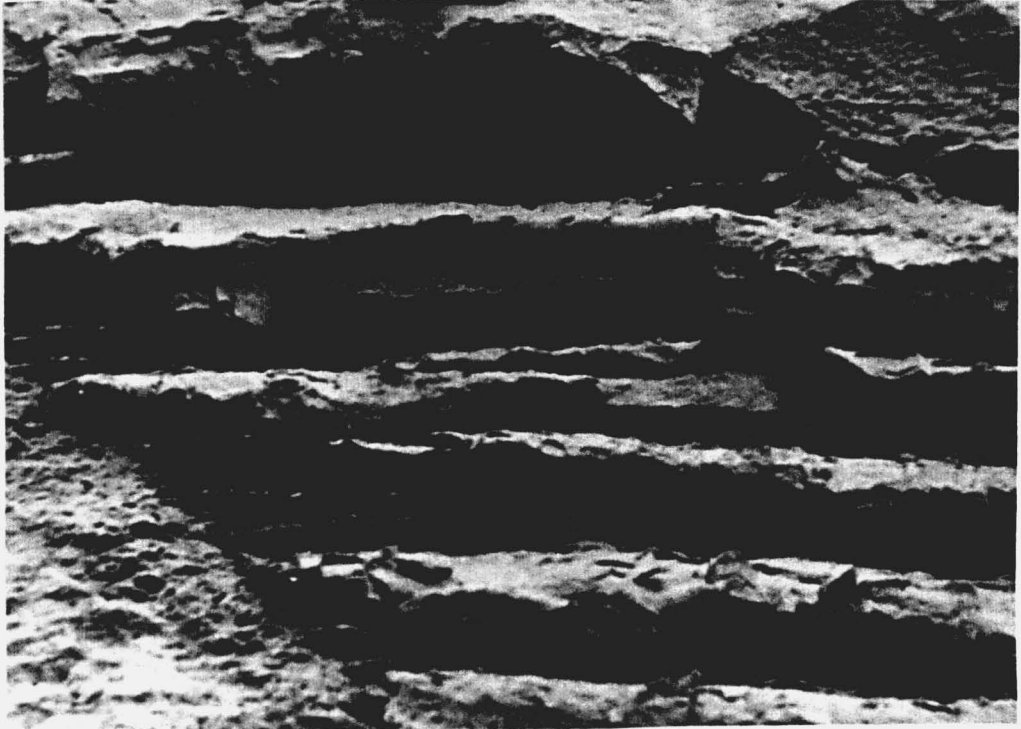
The faceted fracture surface of a specimen of CR6890 x 40
